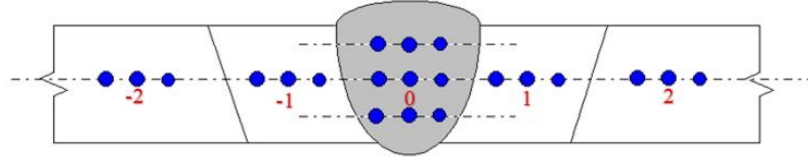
Points where hardness measurements were taken on the weld metal section
